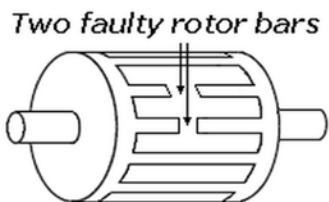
Squirrel-cage rotor of three phases induction motor with two faulty rotor bars
